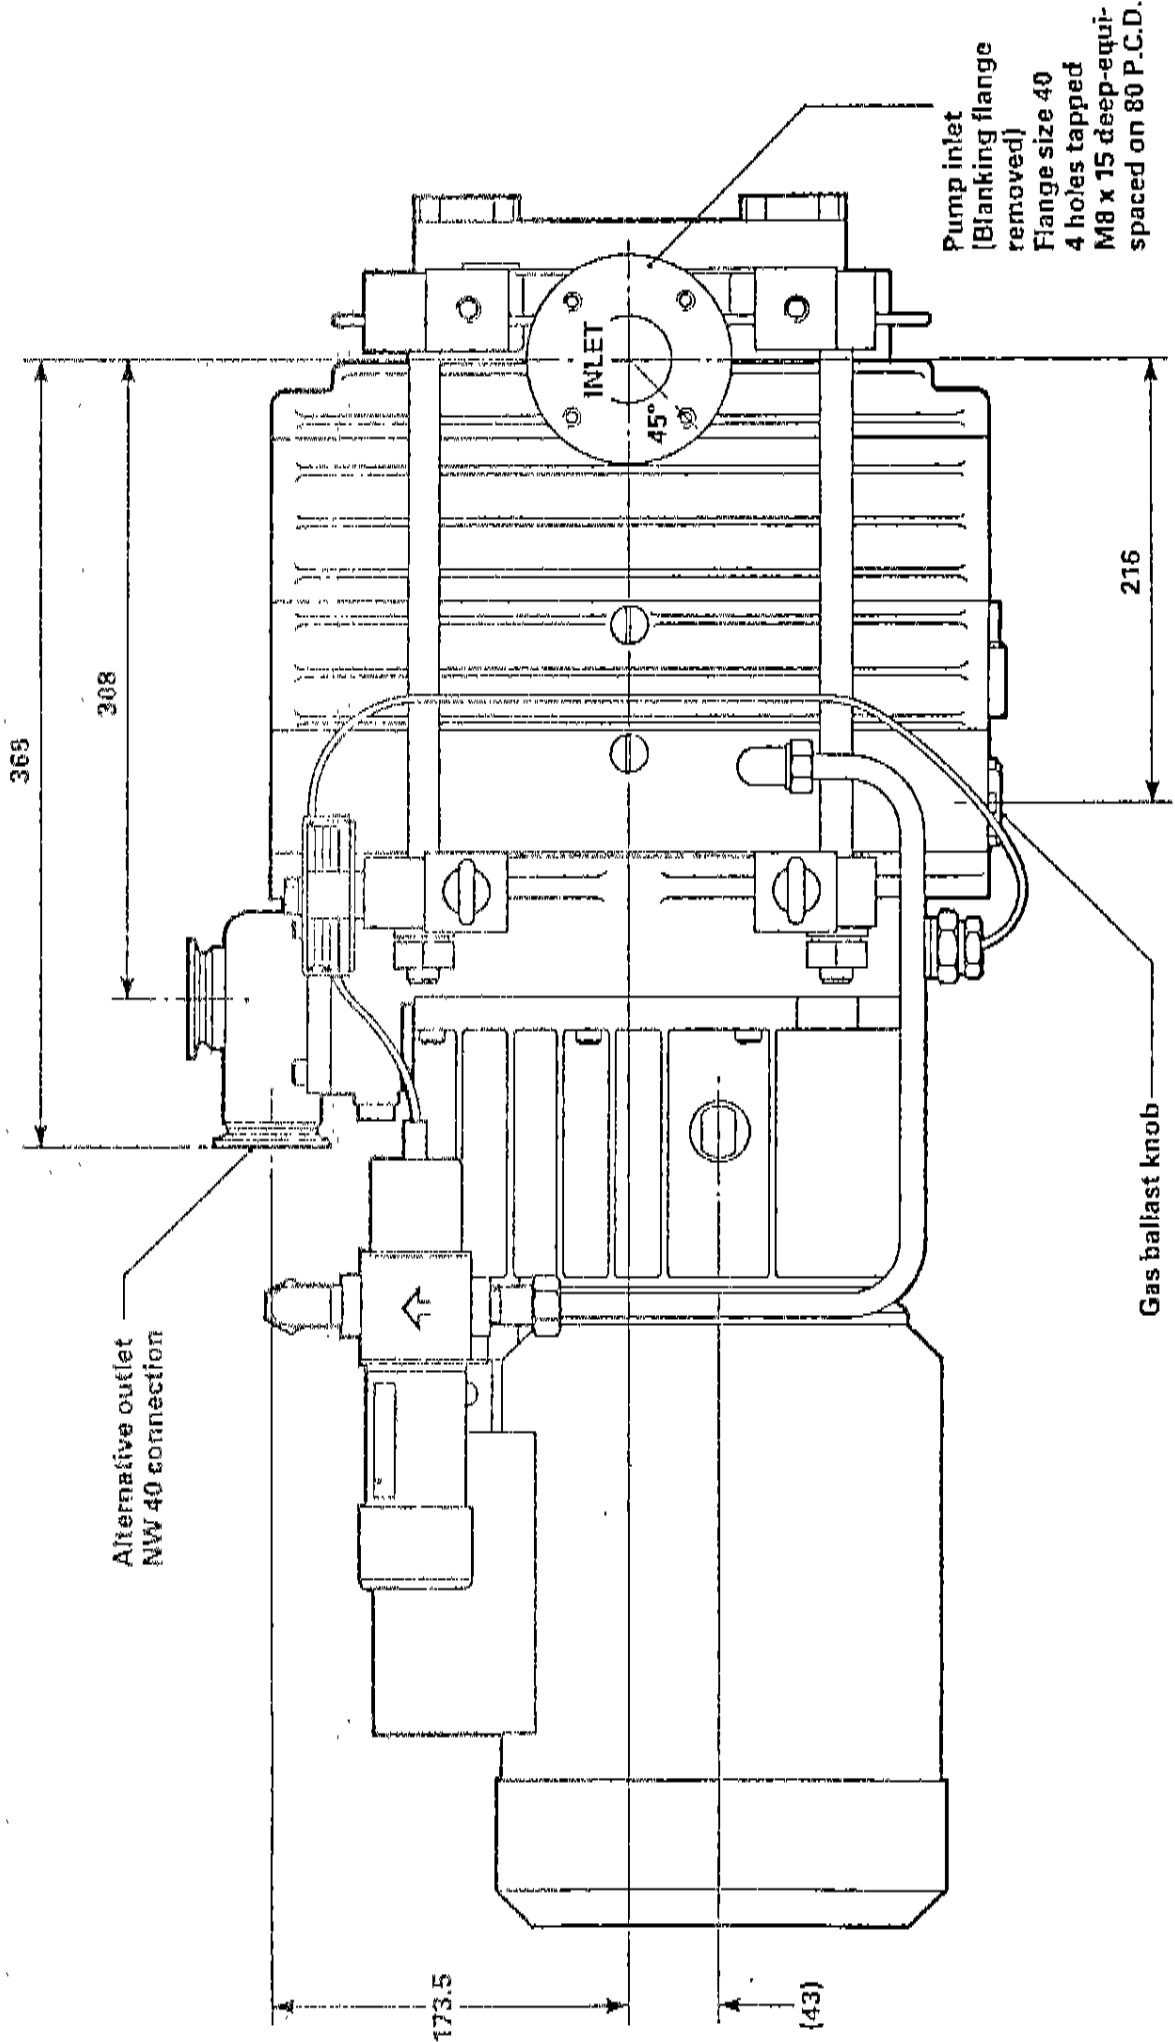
M800 (M800) DIMENSIONS AND INSTALLATION (PART 2)
